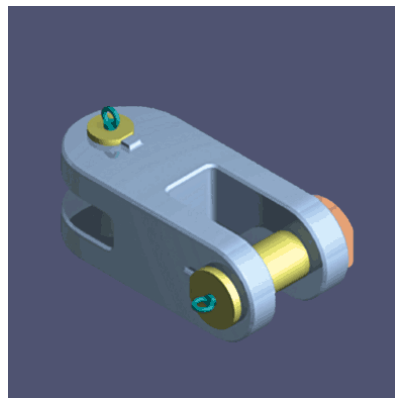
Typical Mooring Components Connected to Anchor Shackles <sup>[7]</sup>
